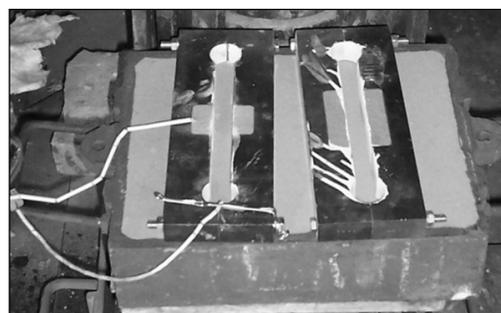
Metal moulds for testing of hot cracking susceptibility directly after pouring
